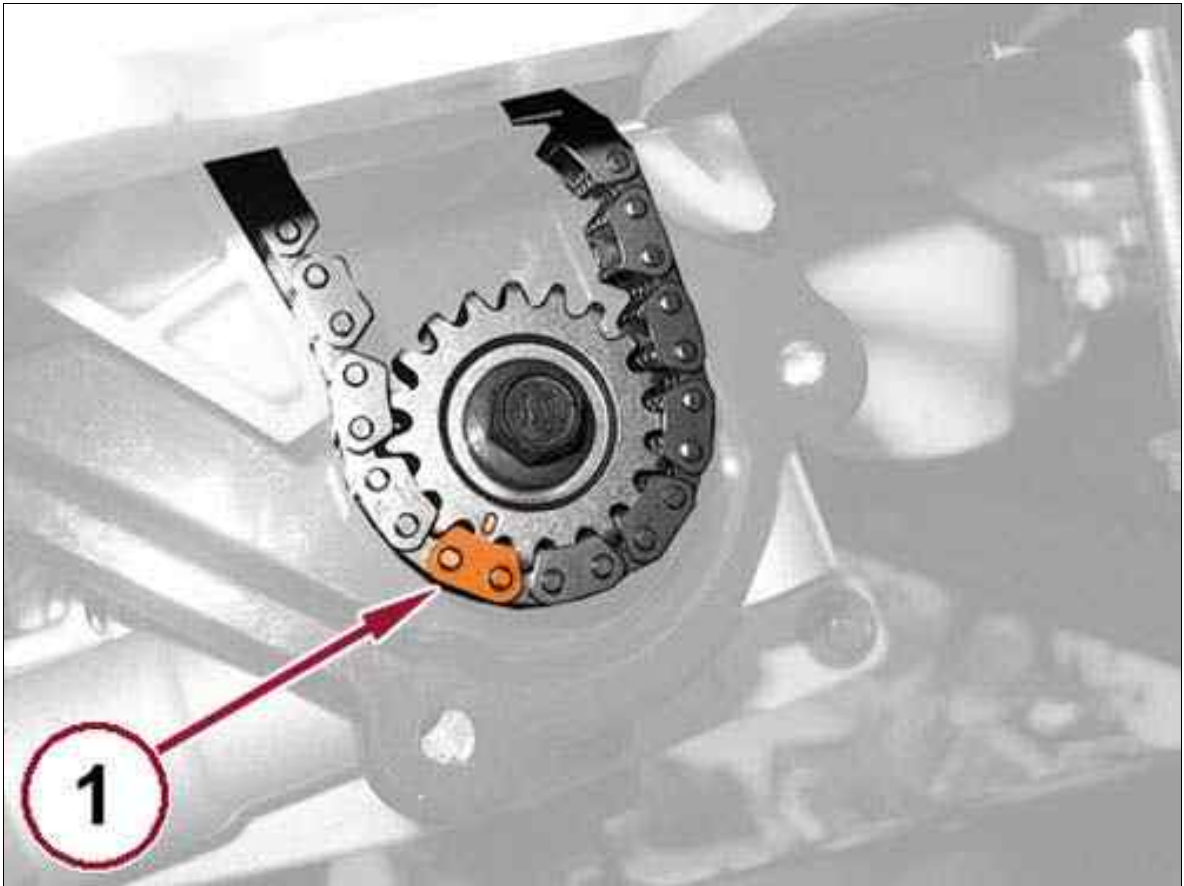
Marking Chain Link Corresponding To Crankshaft Sprocket Timing Mark
